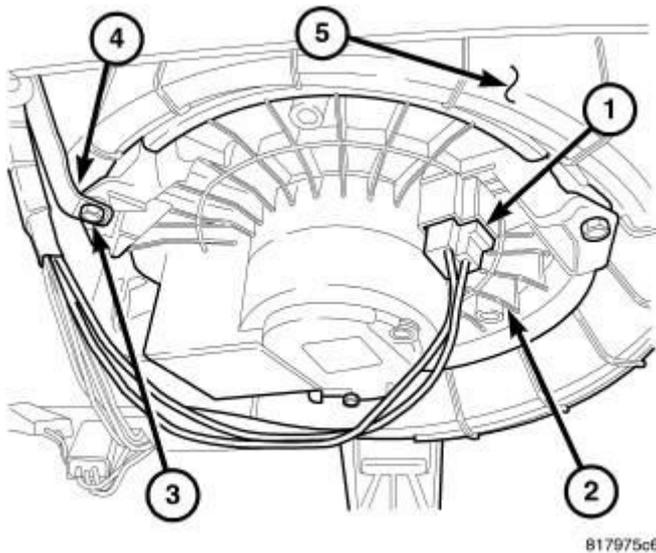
Blower Motor, Bracket, Connector, Screws & HVAC Housing
